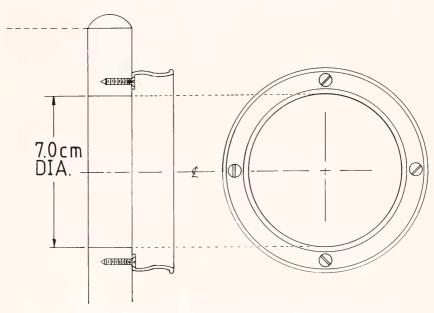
Flat head screws fasten the jar band to the perimeter of a hole 7.0 cm in diameter.
